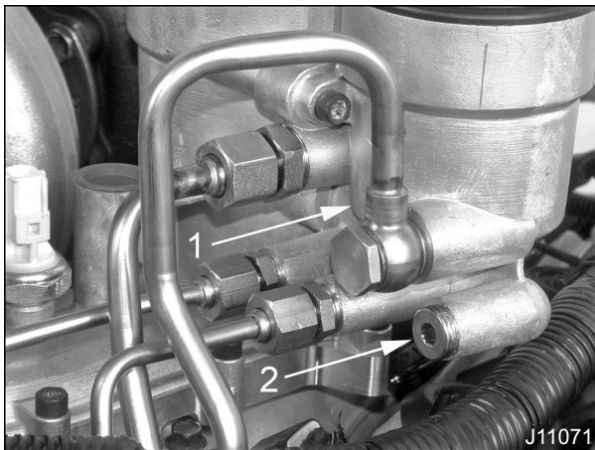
Secondary Fuel Filter housing and Diagnostic port Plug
